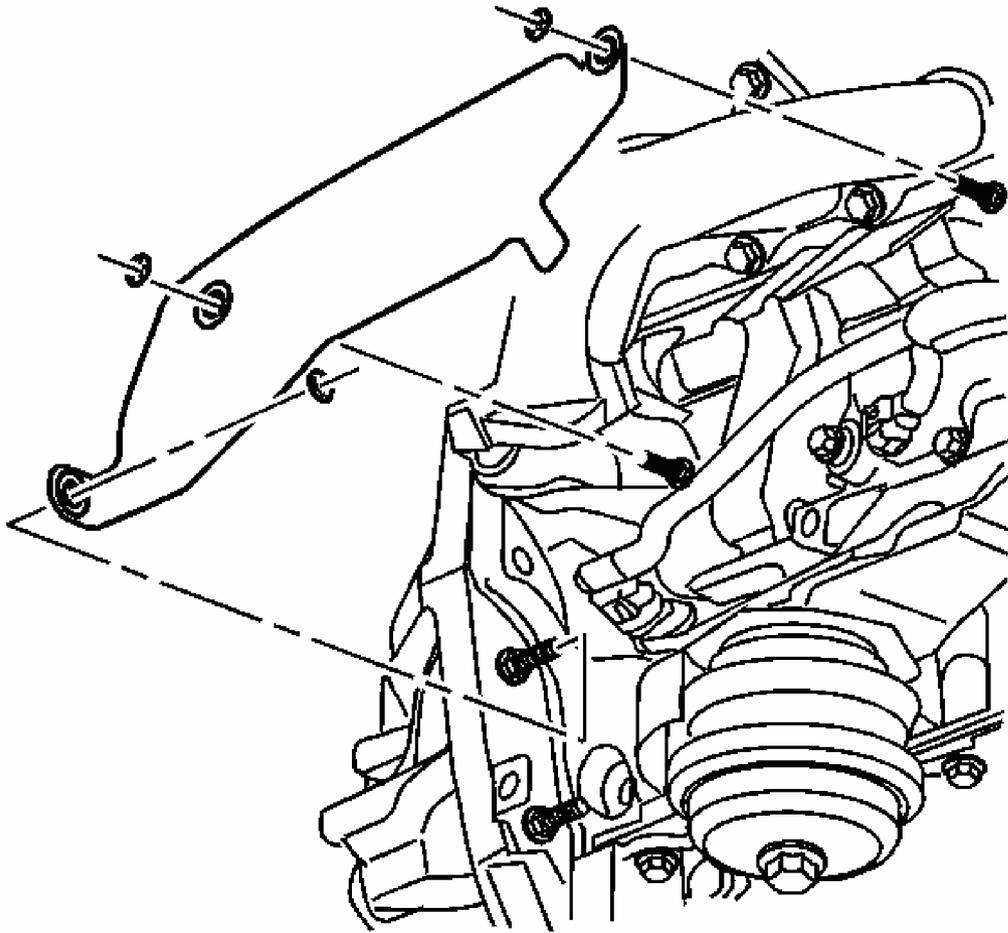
View Of Radiator Outlet Pipe & Bolt
